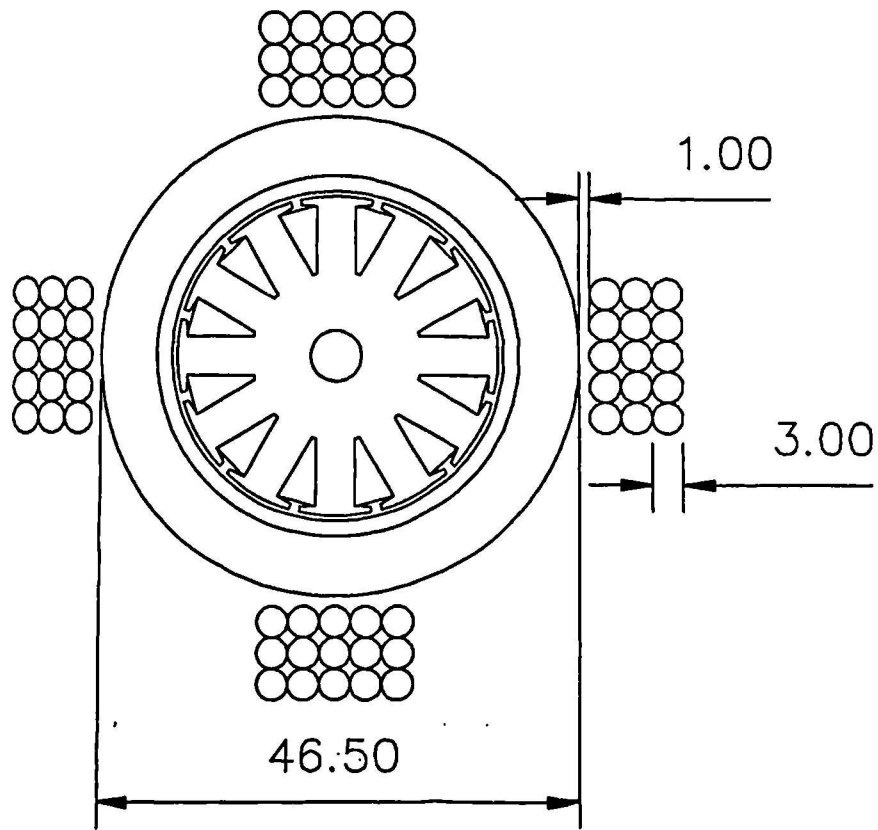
Dimensions of fixture design No.7 selected for further analysis.
